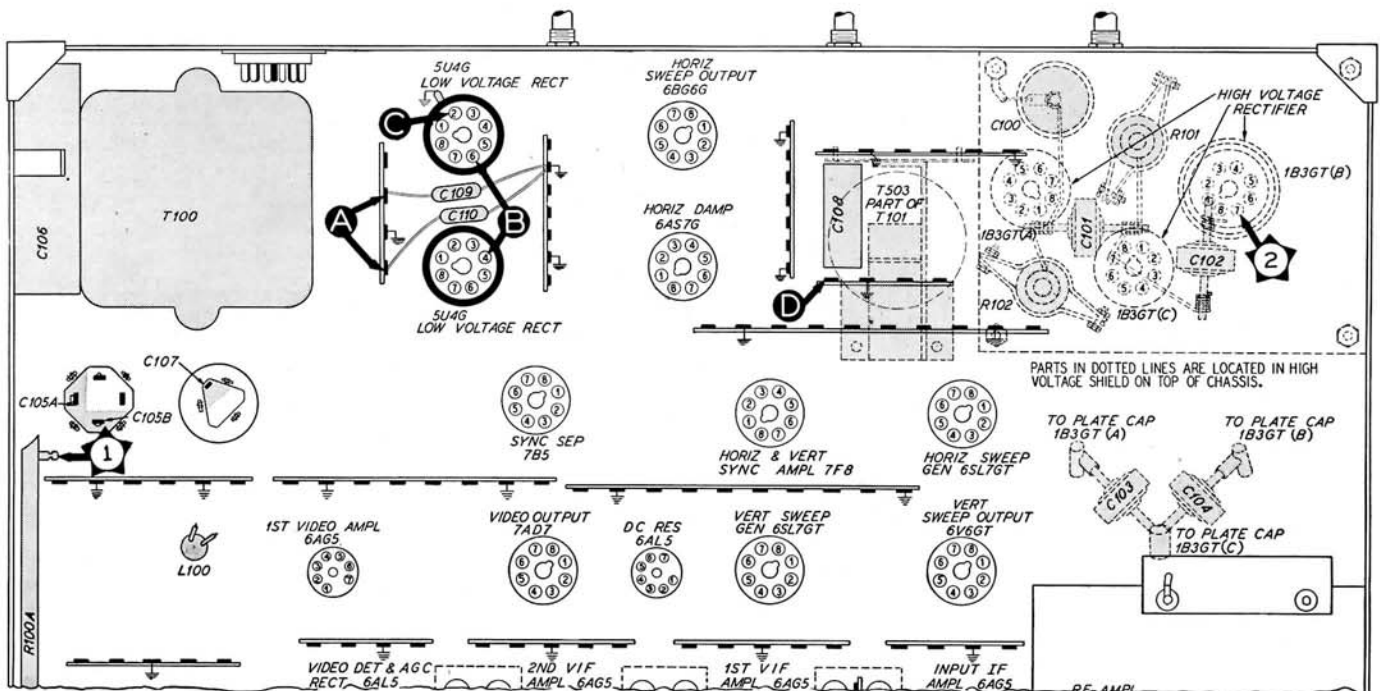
Bottom View of Chassis, Showing Section 1 Test Points
